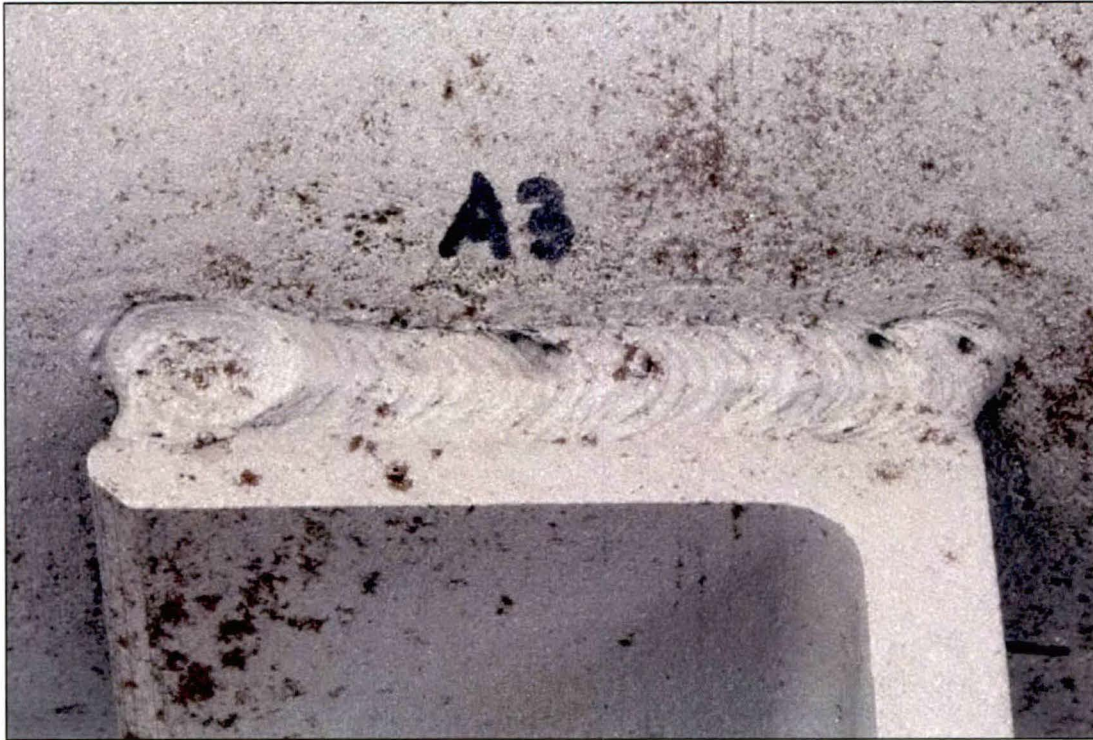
Image of the Lug A3 top weld with some porosity.
